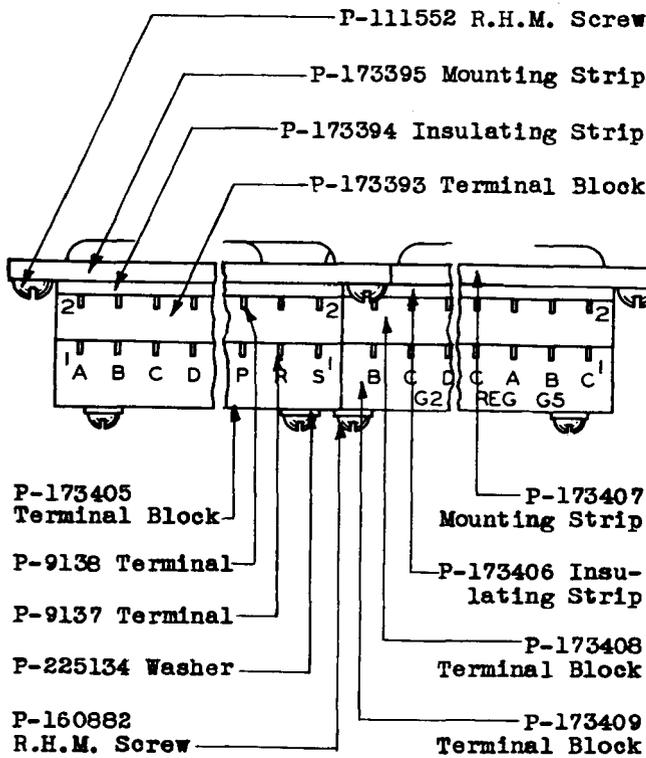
Terminal Block Assembly Parts (No. 170A Interrupter)
